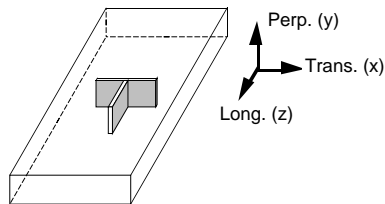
DIRECTIONS RELATIVE TO A WELD
